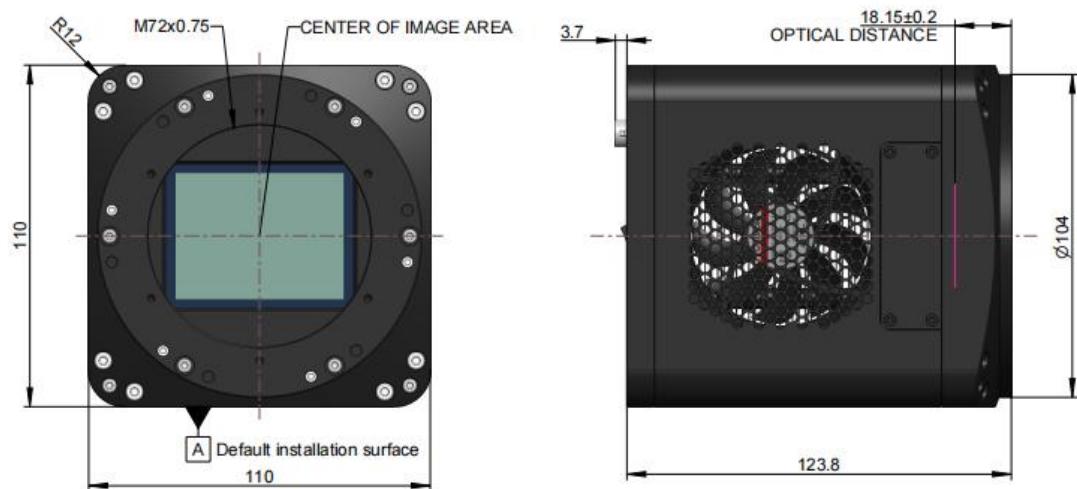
1 MAX251& MAX151 dimensions (mm)
